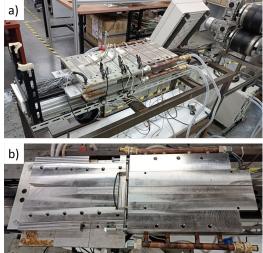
a) Thermoplastic pultrusion setup; b) view of the disassembled lower sides of the heating die and cooling die.
